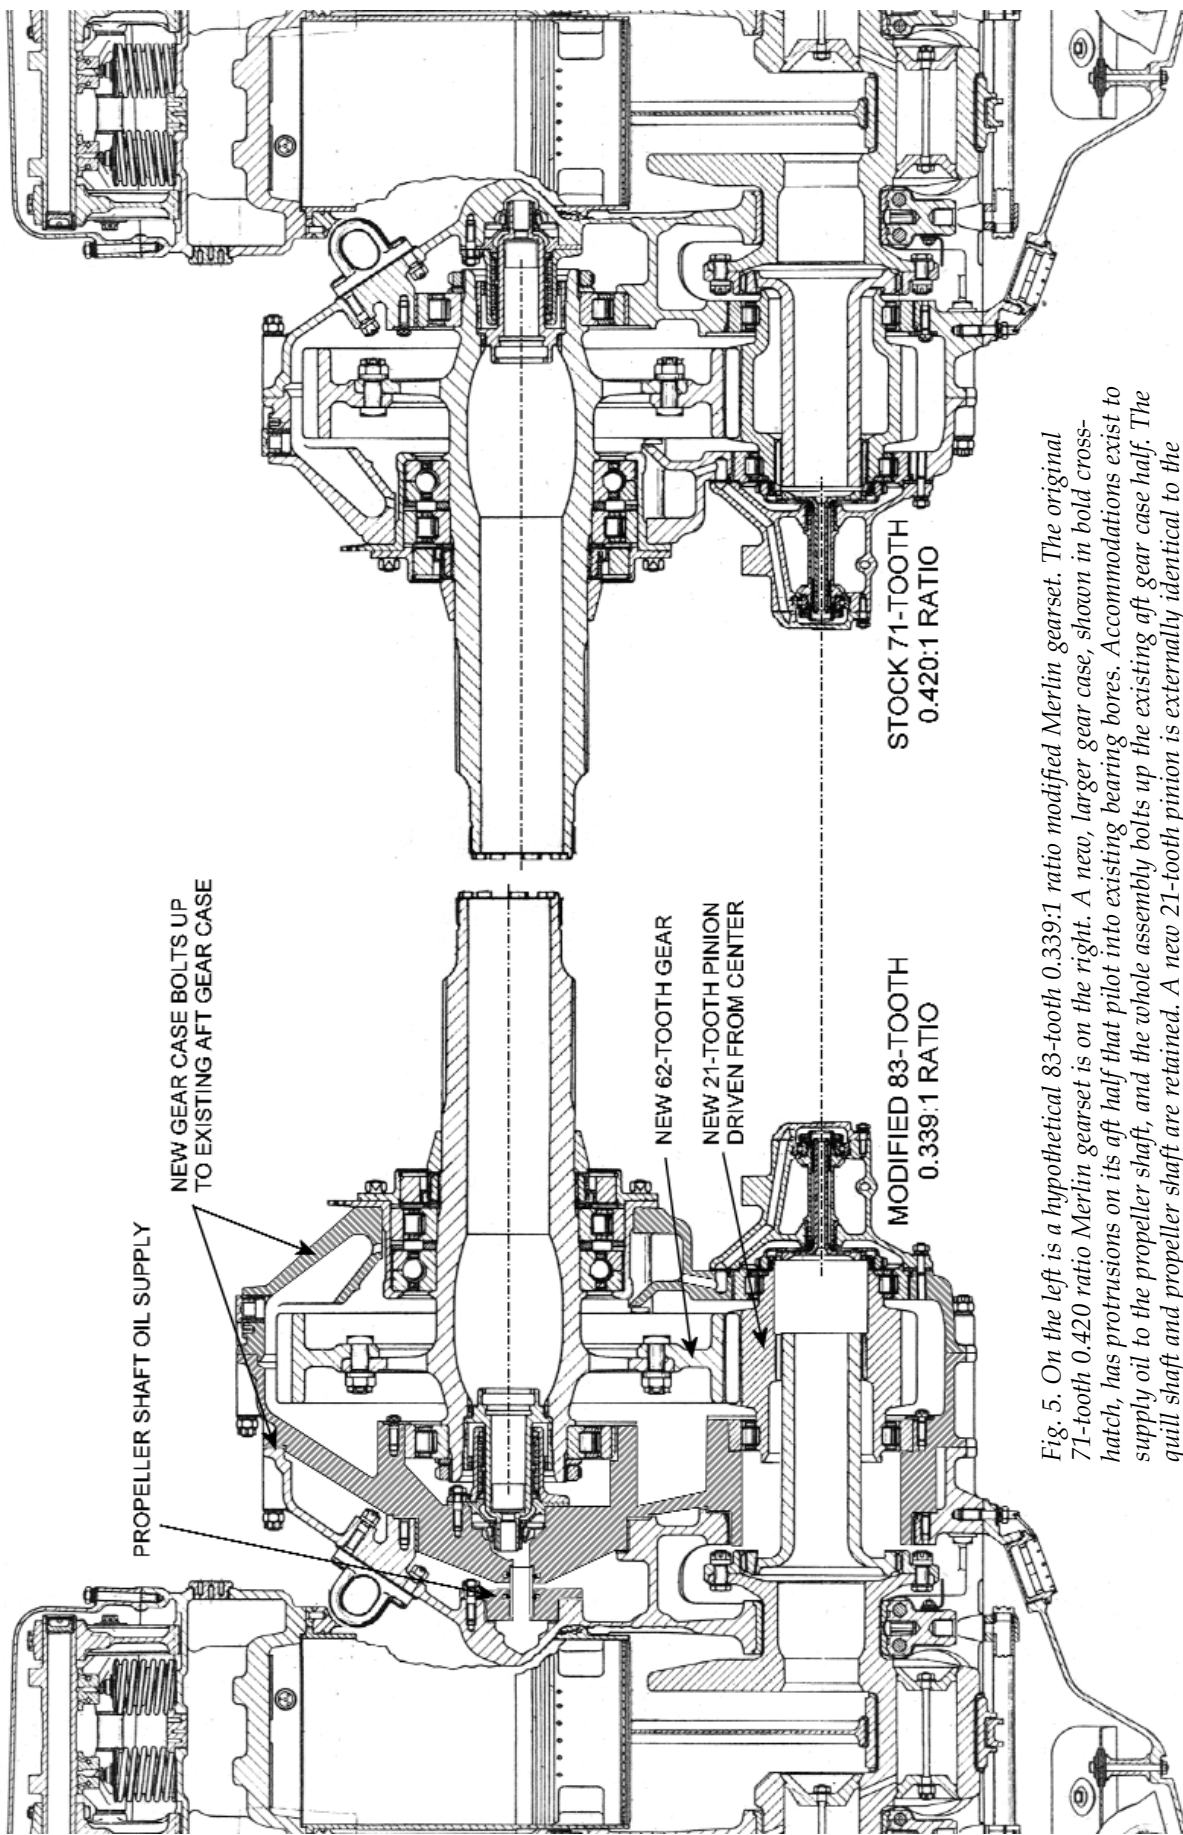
On the left is a hypothetical 83-tooth 0.339:1 ratio modified Merlin gearset. The original 71-tooth 0.420 ratio Merlin gearset is on the right. A new, larger gear case, shown in bold cross-hatch, has protrusions on its aft half that pilot into existing bearing bores. Accommodations exist to supply oil to the propeller shaft, and the whole assembly bolts up the existing aft gear case half. The quill shaft and propeller shaft are retained. A new 21-tooth pinion is externally identical to the original, but internal splines that mate with the quill shaft splines are moved to the pinion center, reducing the tendency for an end-driven pinion to twist under load. The 62-tooth gear is larger than the 50-tooth part it replaces, resulting in an offset propeller shaft.
